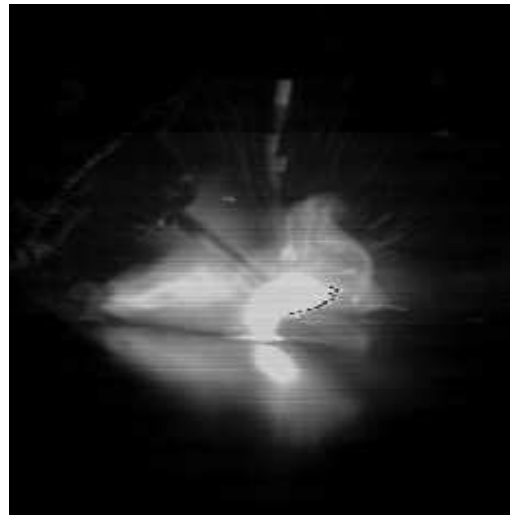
Side View of LBW/GMAW-P Fillet Weld Humping in a Lap Joint for Specimen 80305b with Wire Offset too Much onto the Top Sheet WFS 15.2 m/min, TS 3.0 m/min, 225 A, 34 V, 16-mm CTWD, 1.6-mm Sheet
